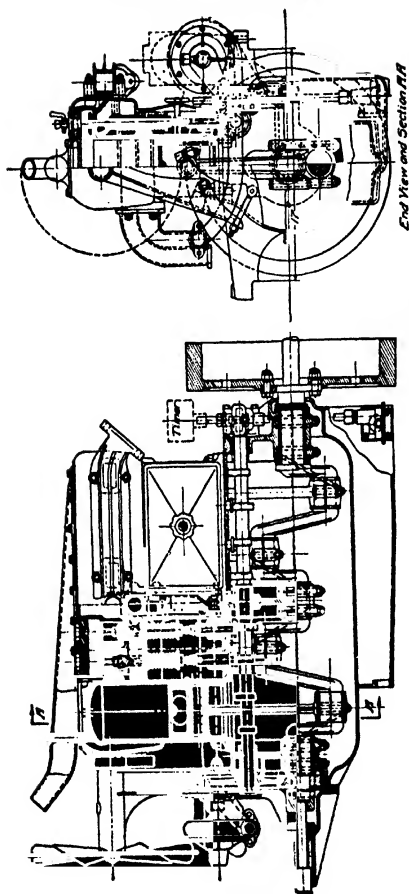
Typical "L" Head 4-Cylinder Automobile Engine
